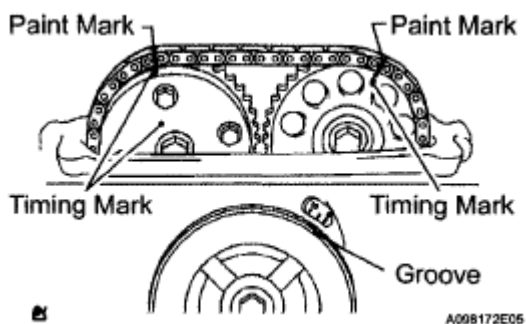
Identifying Paint Marks On Chain And Camshaft Timing Gears
